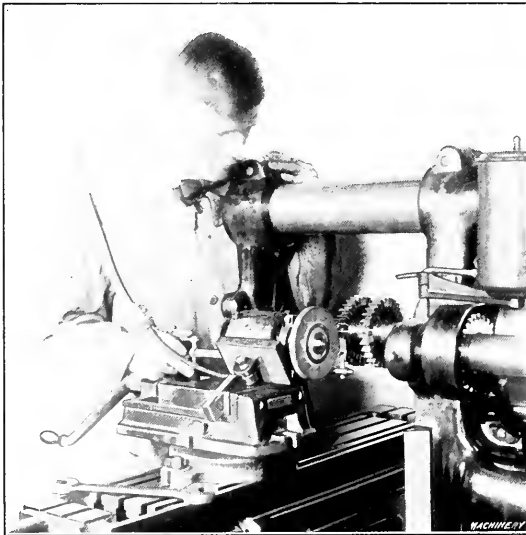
Sharpening Milling Cutters with the Wisconsin Grinder
